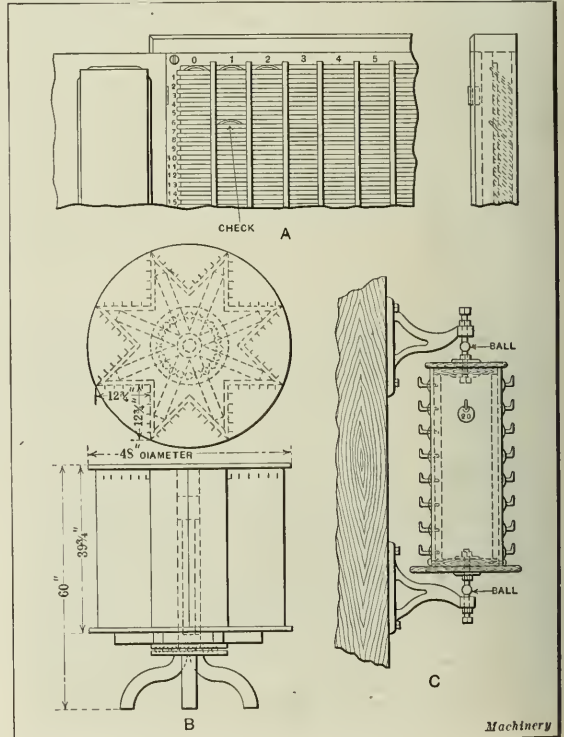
Three Forms of Check Boards or Cabinets for Tool Supply Rooms
